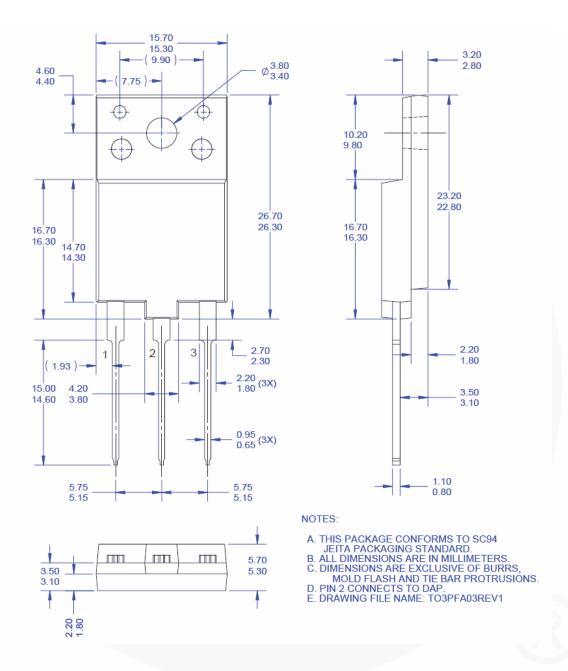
TO3PF, Molded, 3-Lead, Full Pack (AG)
